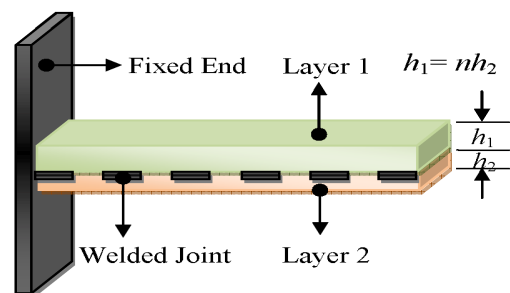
(a) Two layered tack welded cantilever beam model
